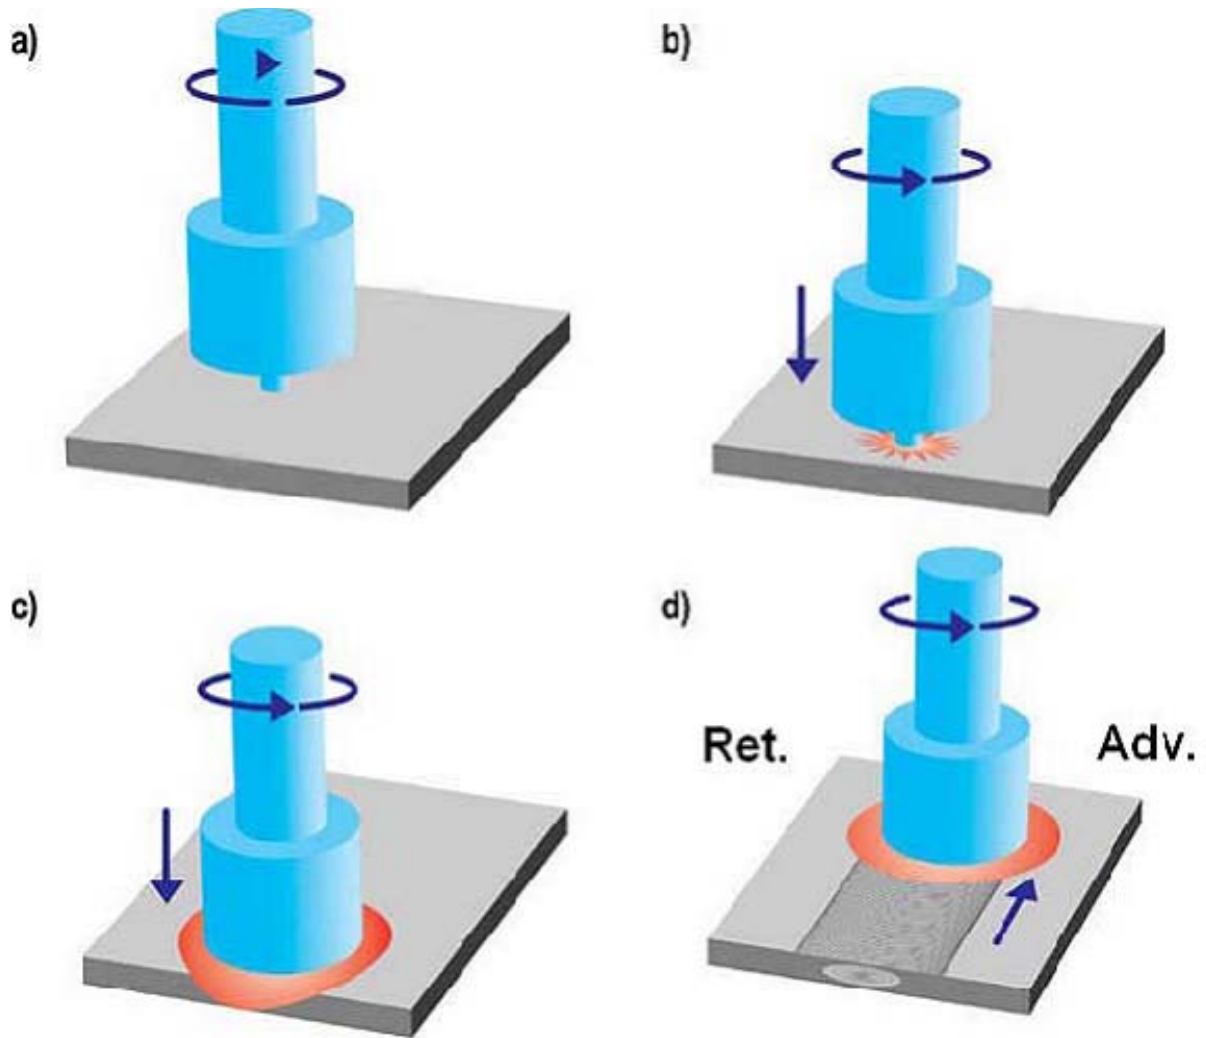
Friction stir processing illustration showing a) rotating tool with pin; b) application of pressure to force pin into work piece through adiabatic heating and softening; c) creation of stir zone around the tool; d) transversing of tool through work piece. From [4].
